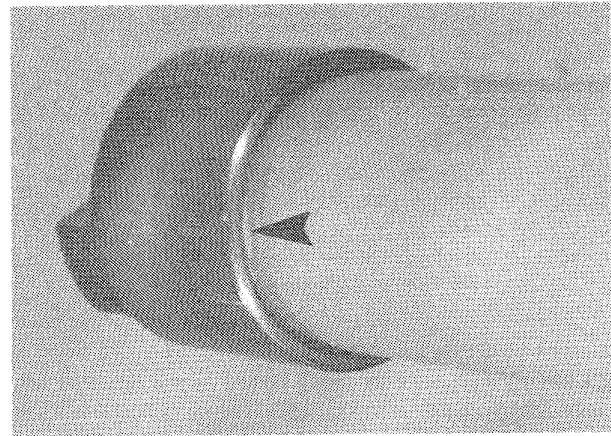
End of the contact plug epoxy shaft with cracks around its circumference.
